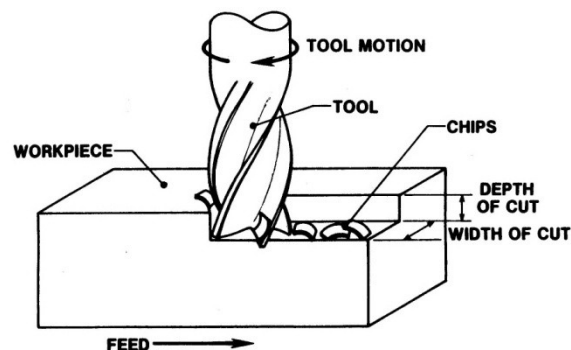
Process schematic for end milling (Todd et al., 1994)
